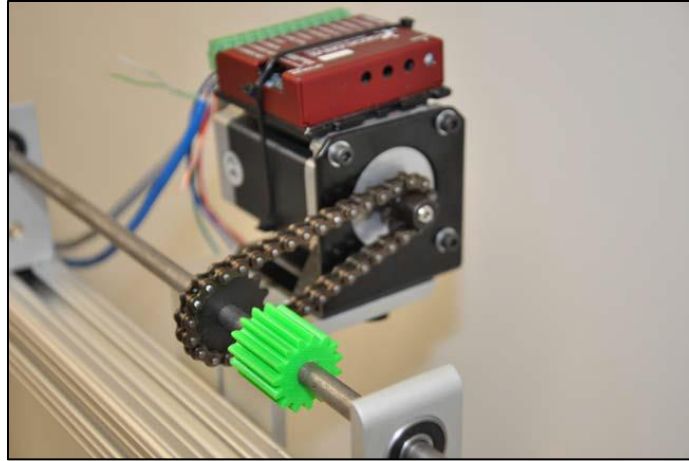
The y-axis carriage drive motor. The motor turns an axel which actuates drive belts to provide even force to both ends of the carriage simultaneously.
